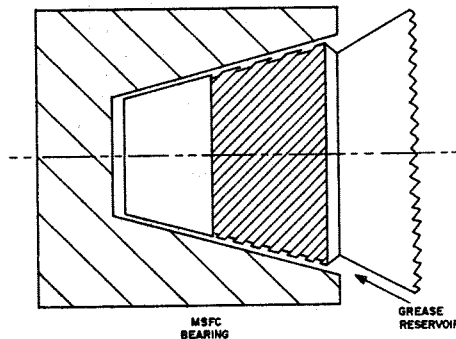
Method for Returning Squeezed-Out Grease to the Bearing Surfaces
